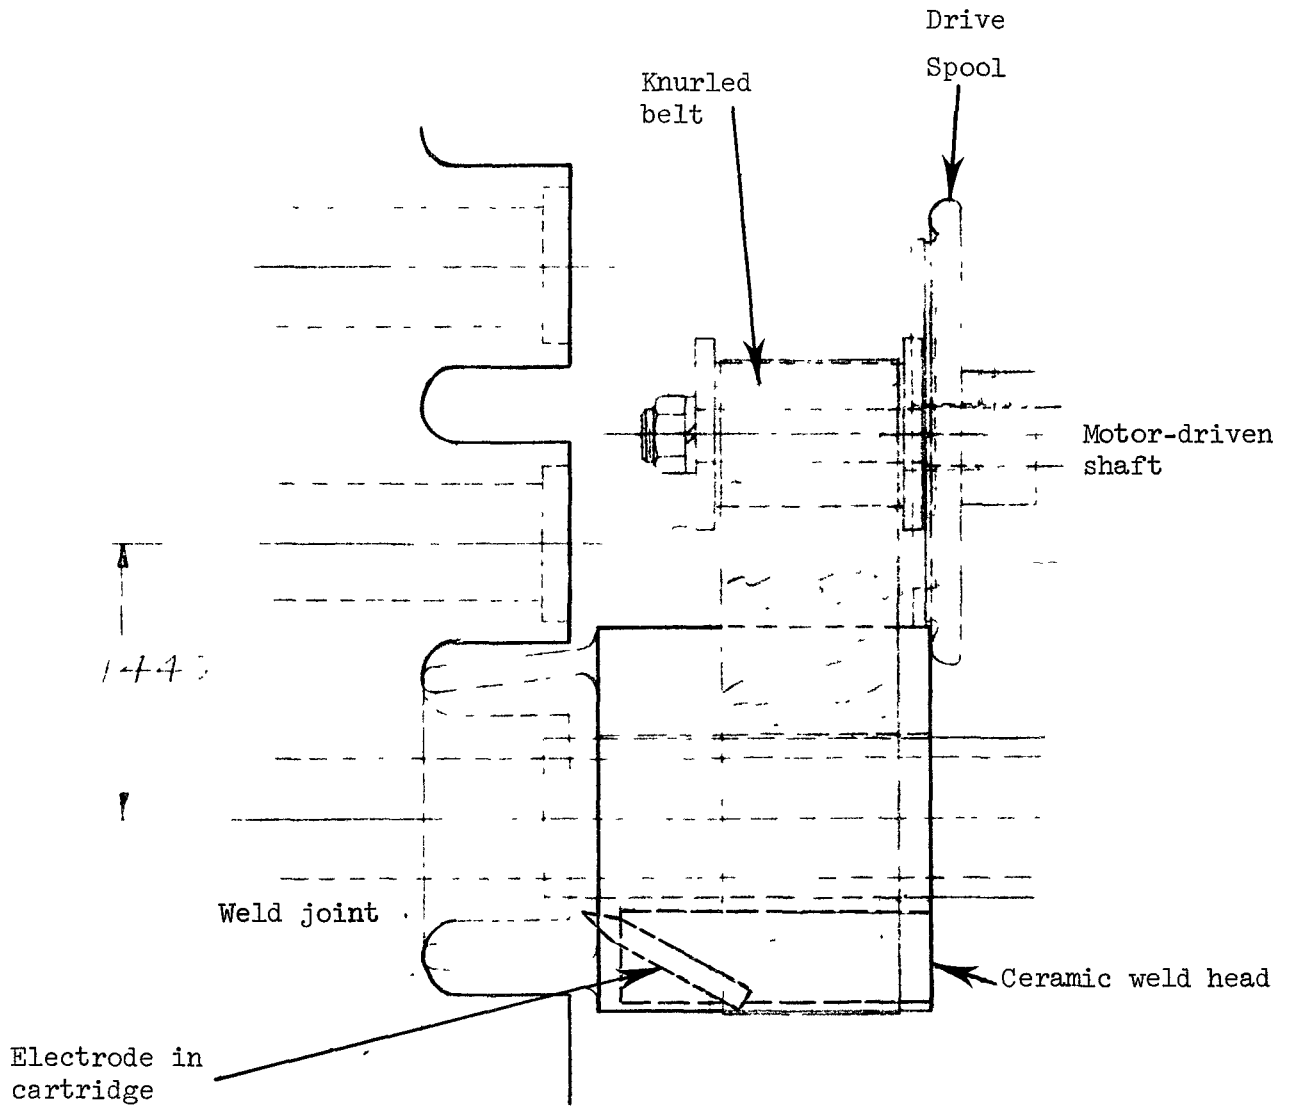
GE/Olympic Engineering Orbital Weld Head
